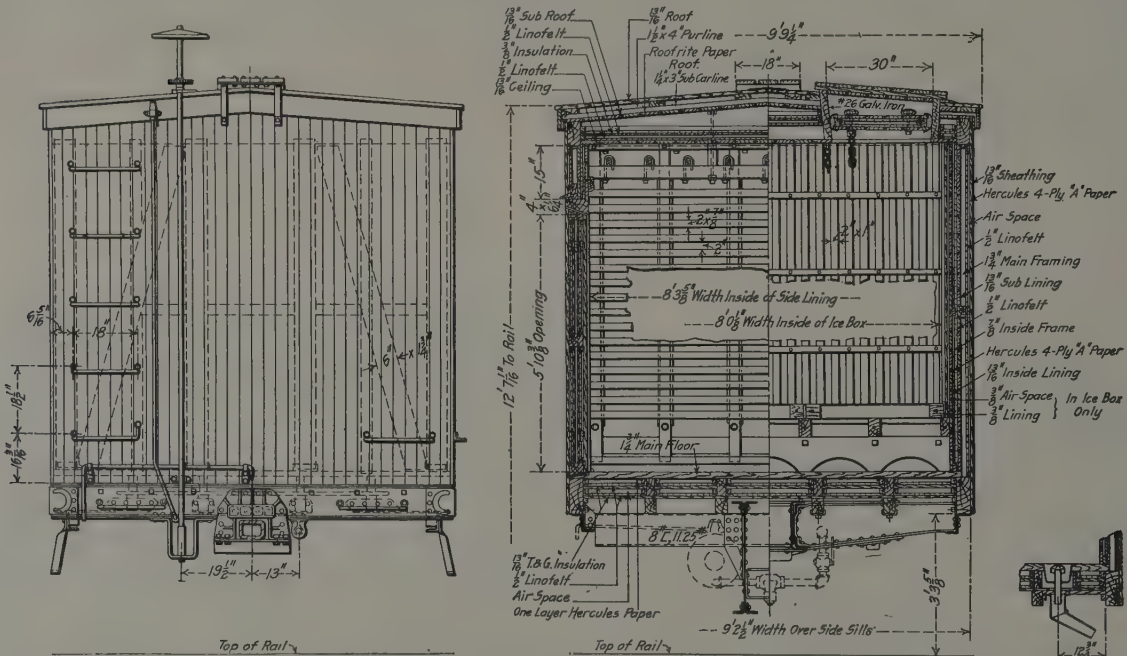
End Elevation and Cross Sections of American Refrigerator Transit Company Steel Underframe Refrigerator Car Shown in Figs. 223 and 226.
